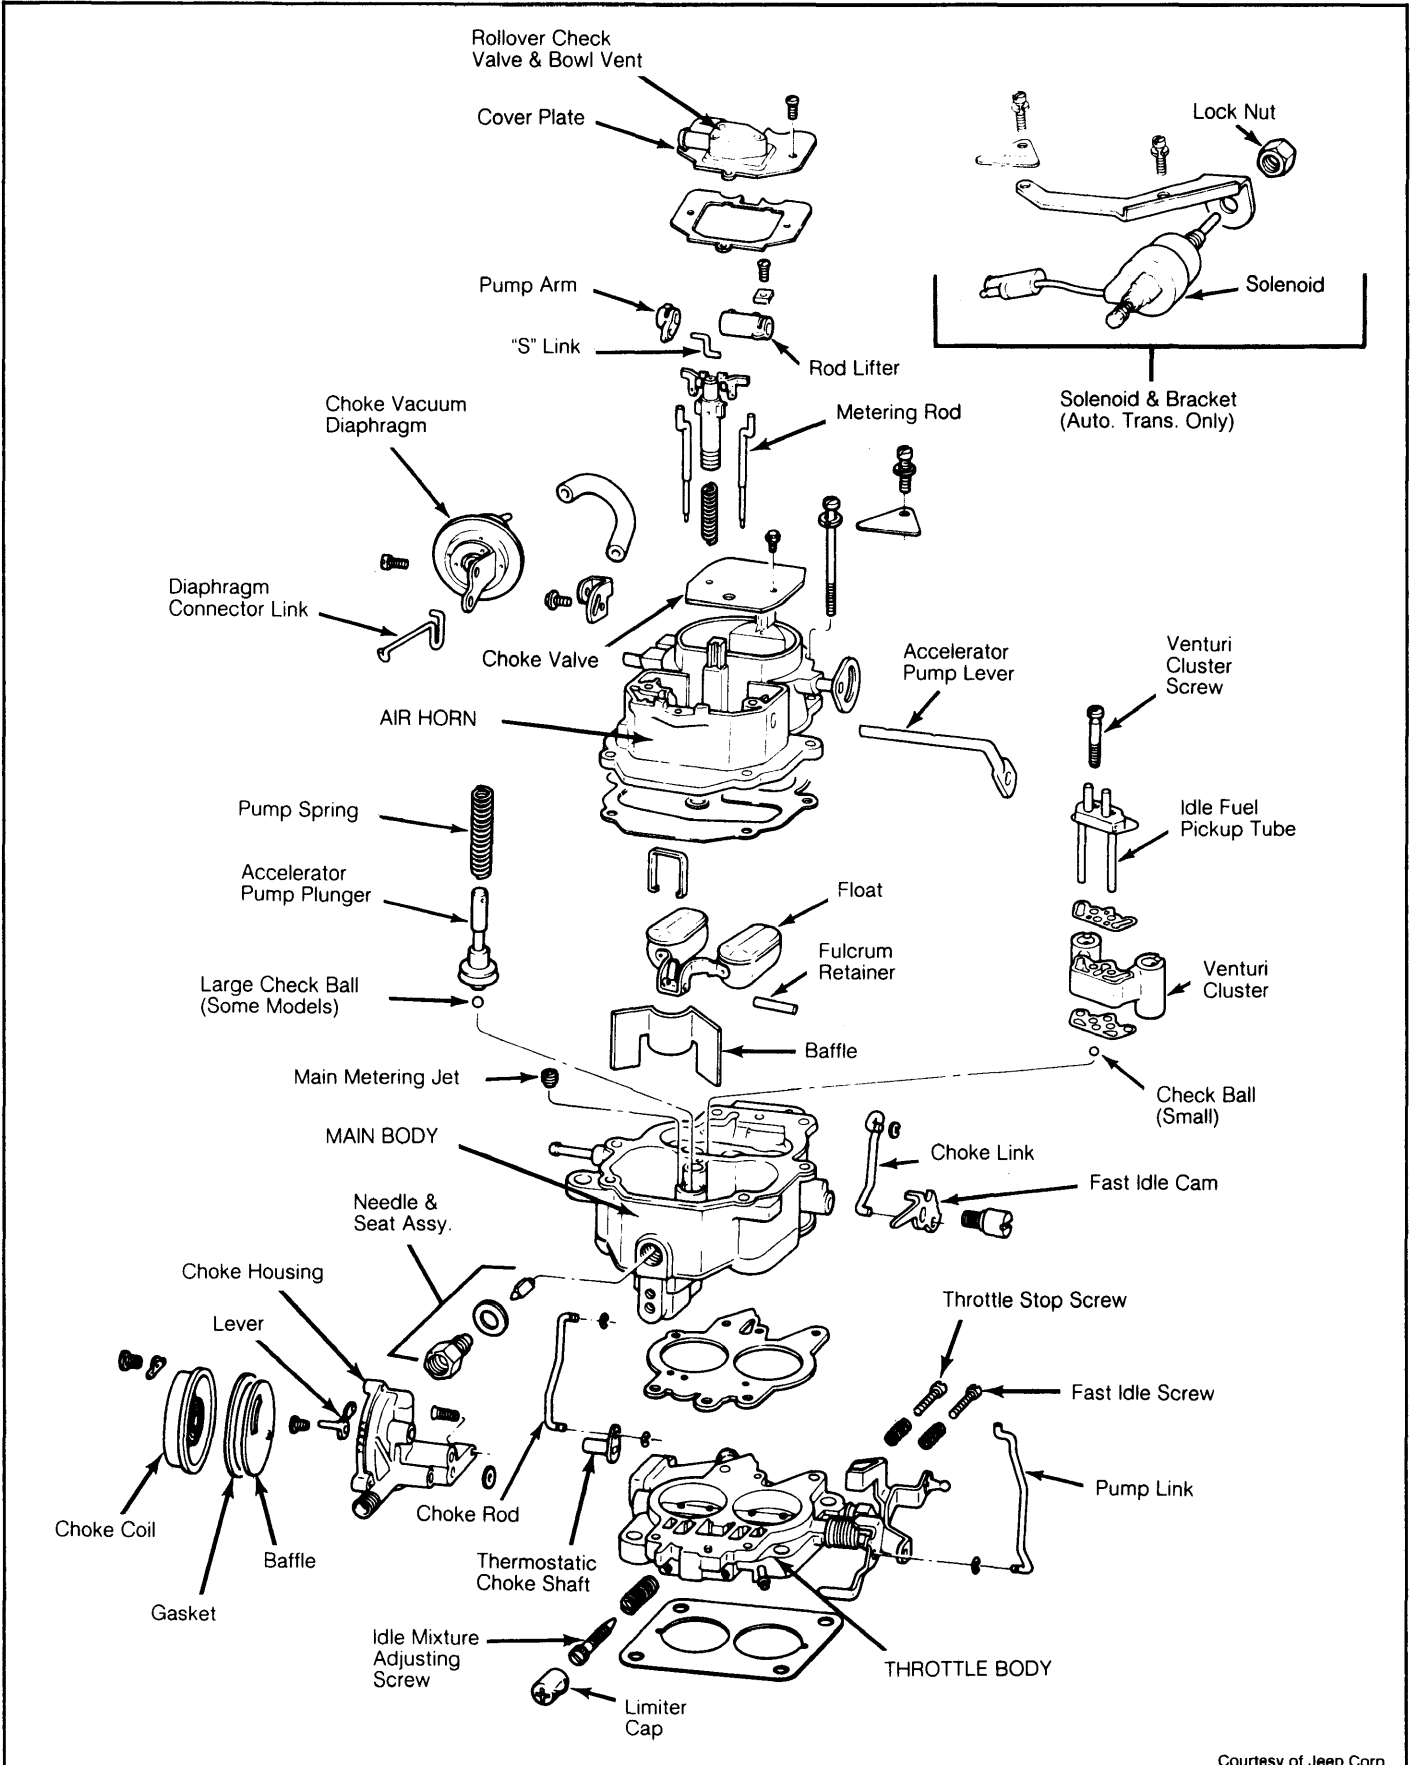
Exploded View of Carter Model BBD 2-Barrel Carburetor
